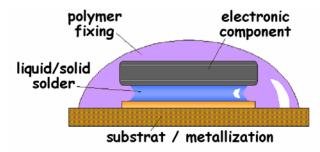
Principle Scheme of a Combined Joint with Solid/Liquid Solder
